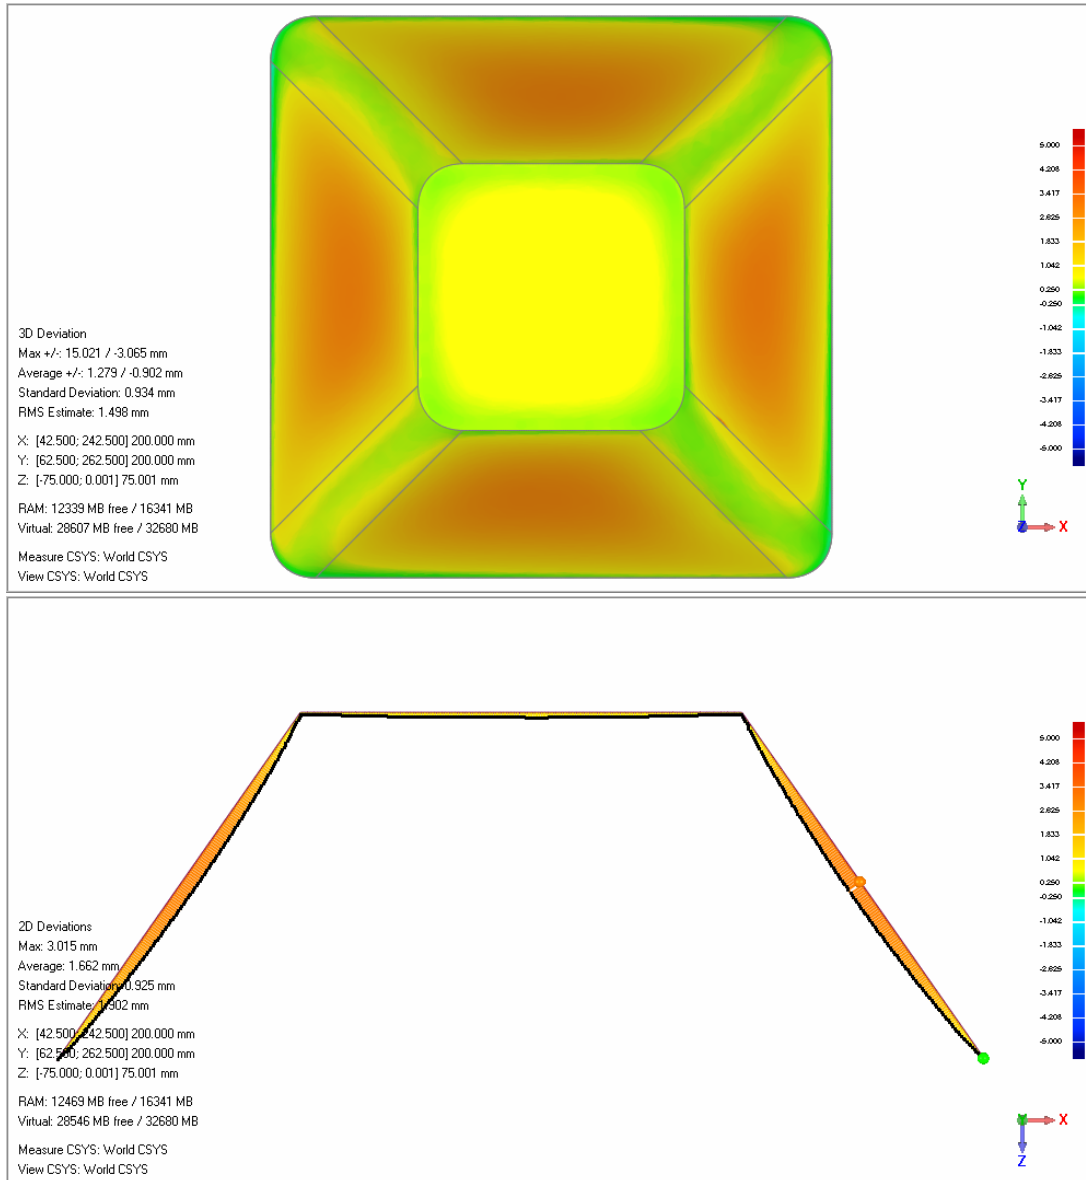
Part T1A geometric accuracy results - top view and cross-section view
